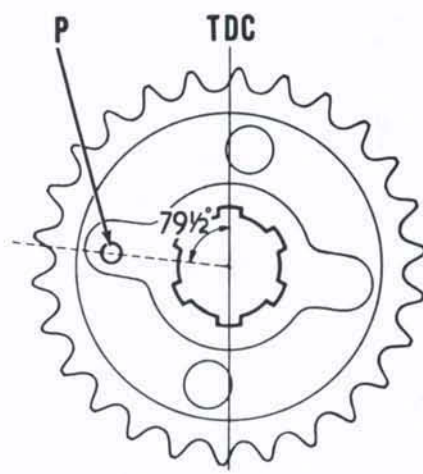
The peg (P) on the primary drive sprocket should be at approximately 9 o'clock position when the crankshaft is at top dead center (TDC).
